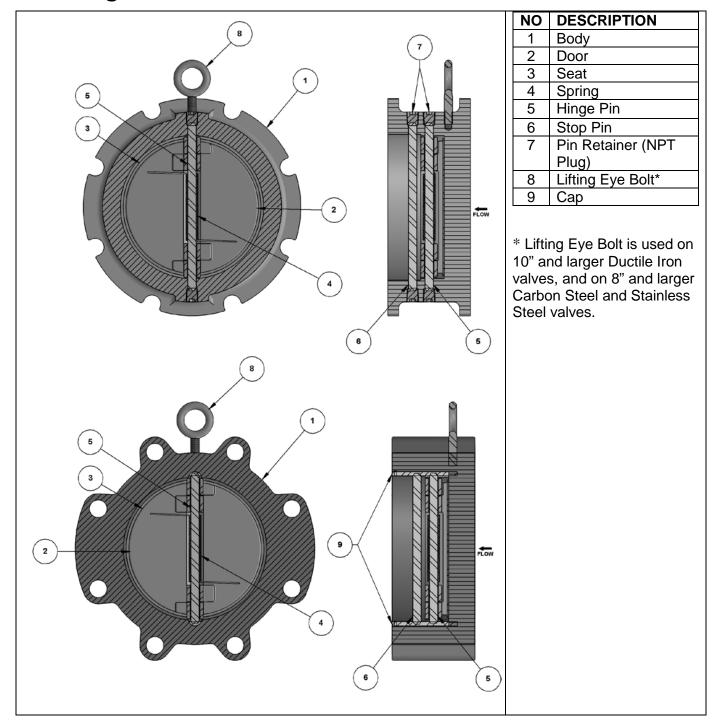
CDD-9000T Double Door Check Valve (Wafer and Lugged versions)
